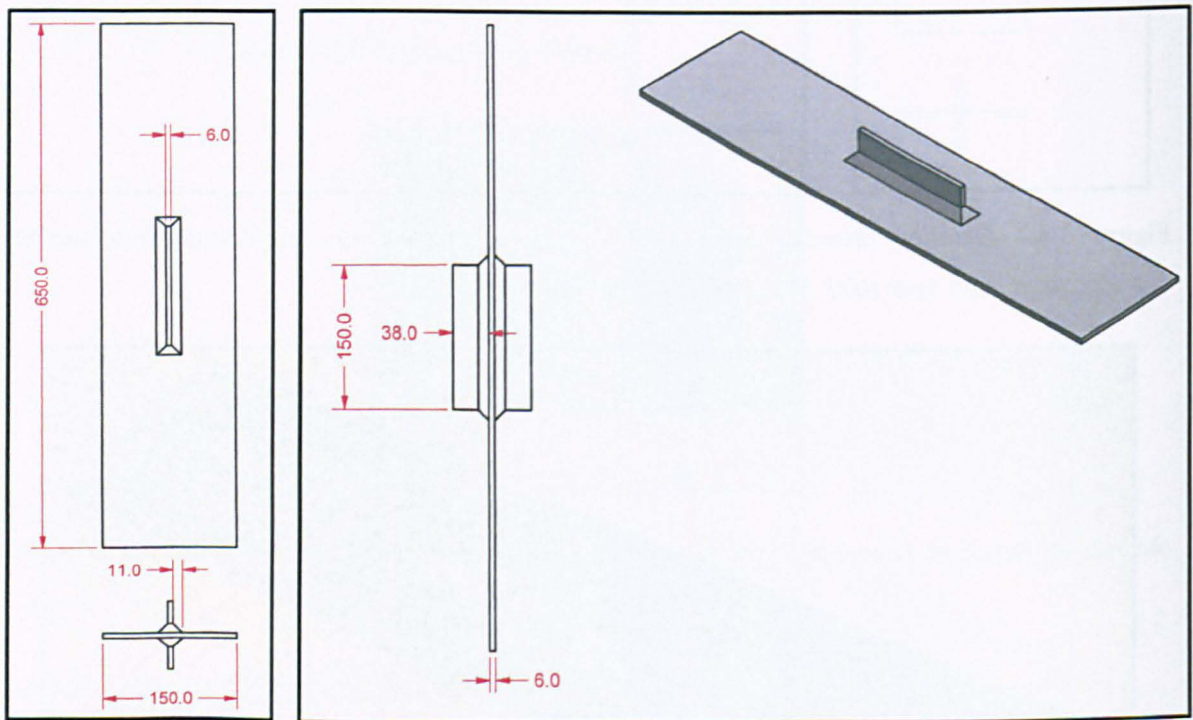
Detailed drawing of a fillet welded specimen with longitudinal attachments manufactured from 6mm thick 6082 T651 aluminium alloy.
